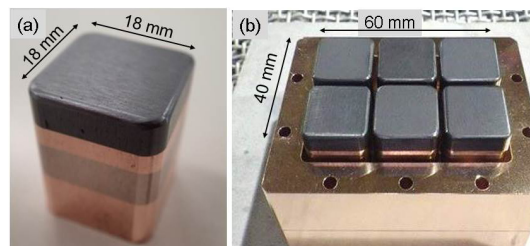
(a) A square ferrite-copper block machined from the cylindrical one in Fig. 3 (a), and (b) the assembly of six ferrite-copper blocks brazed to a copper block.
